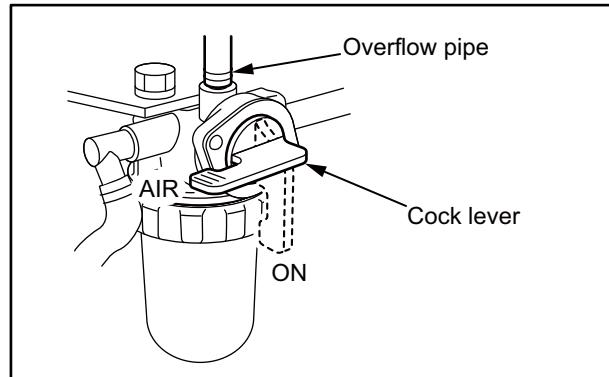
Fuel filter element (switching cock type) - Bleed air
